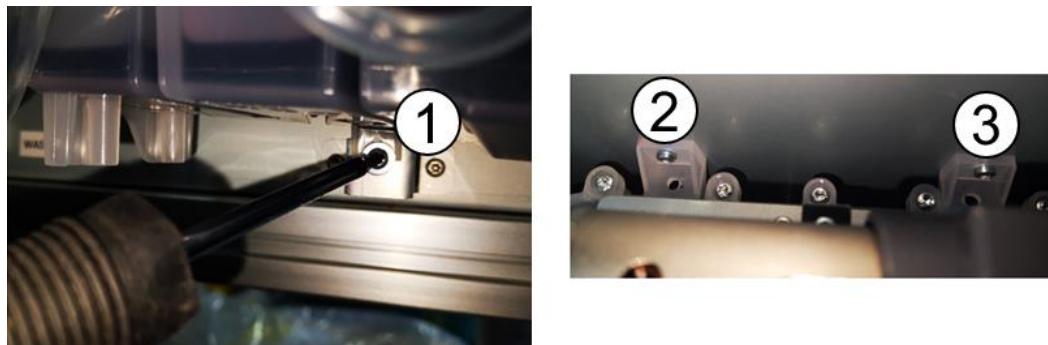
WIMM Assembly – Bottom Mounting Method
